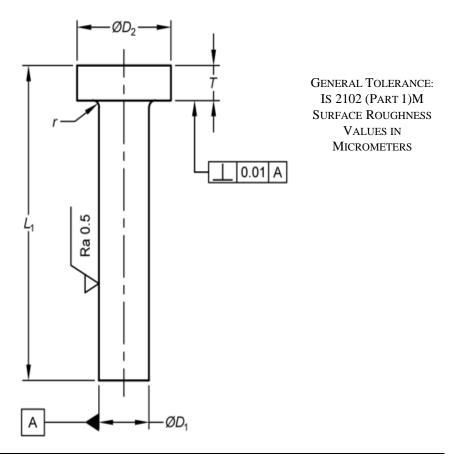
PUNCHES WITH STRAIGHT SHANK — TYPE A
